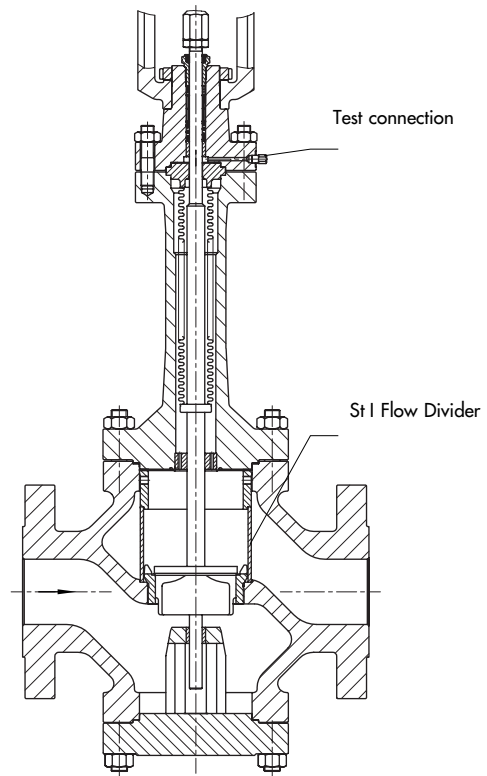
· Type 3254 Globe Valve with St I Flow Divider and additional metal bellows seal with test connection
